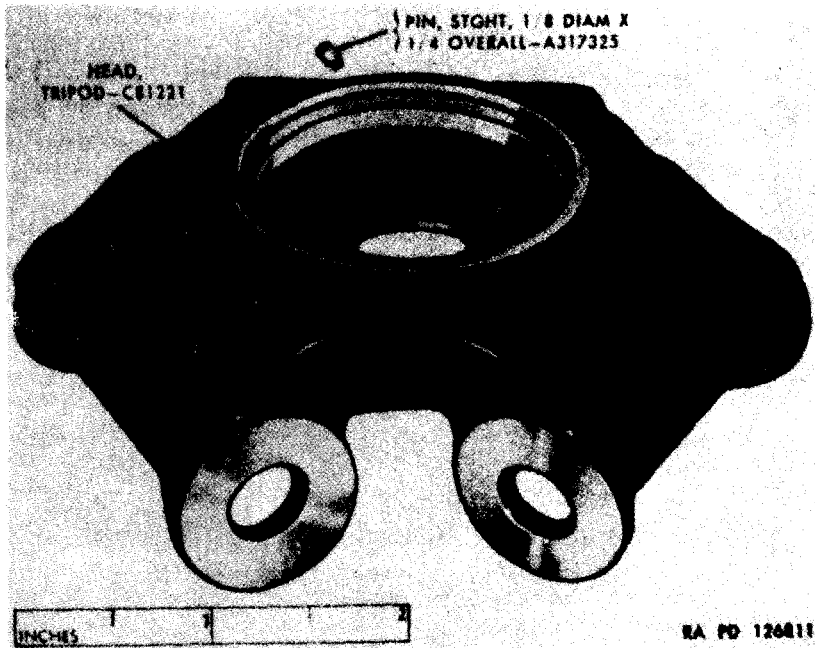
Stripped tripod head assembly B181036 - exploded view.
